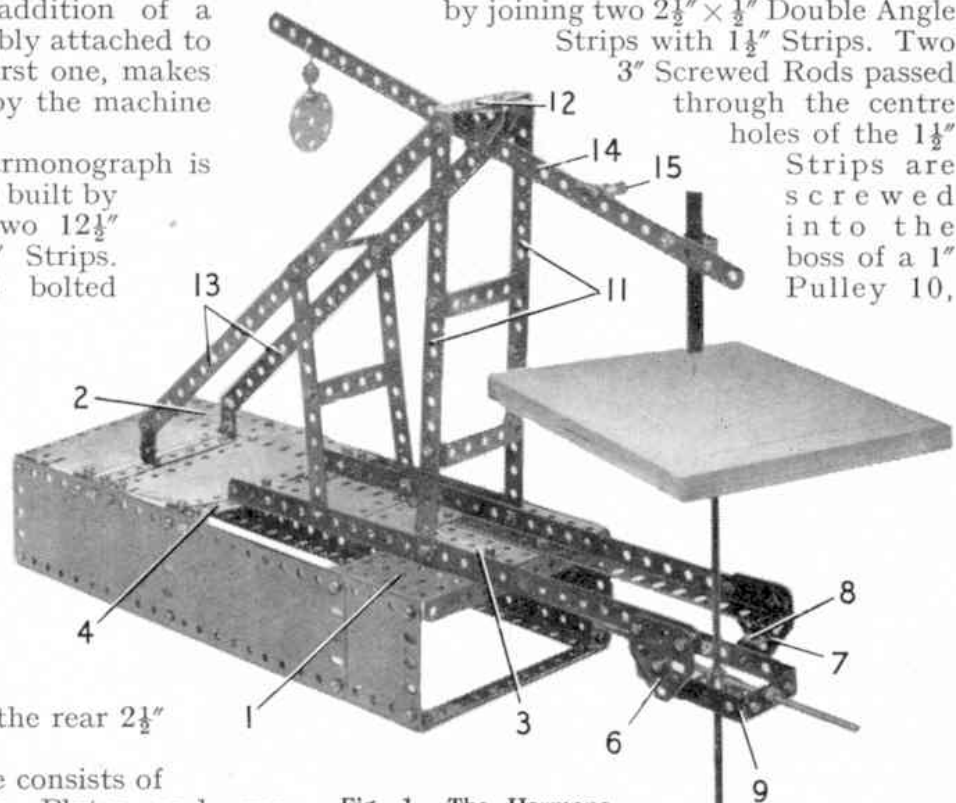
The Harmonograph, a machine that produces fascinating designs by means of a swinging pendulum.
